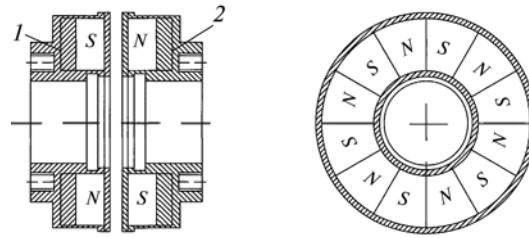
Front magnetic clutch: 1, 2) half-clutches.
